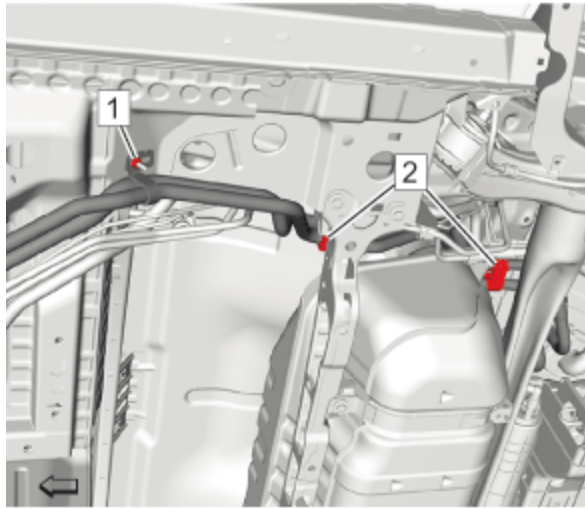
Drive Motor Generator Control Module Cooling Outlet Hose And Nut
